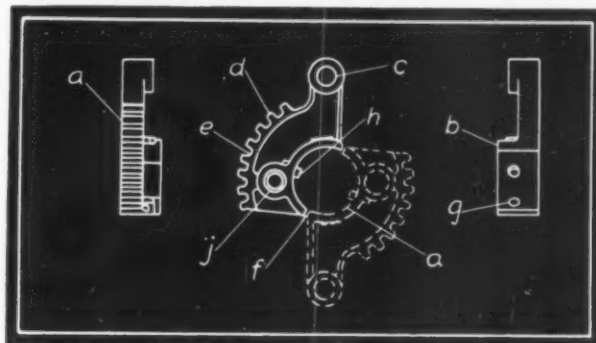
Cost of die casting this drive is about one-half of the cost for machining an ordinary cast unit
